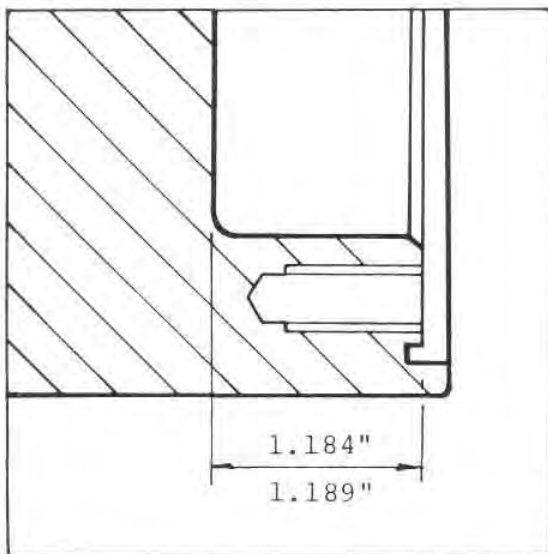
Flywheel Friction Face to Cover Mounting Measurement
